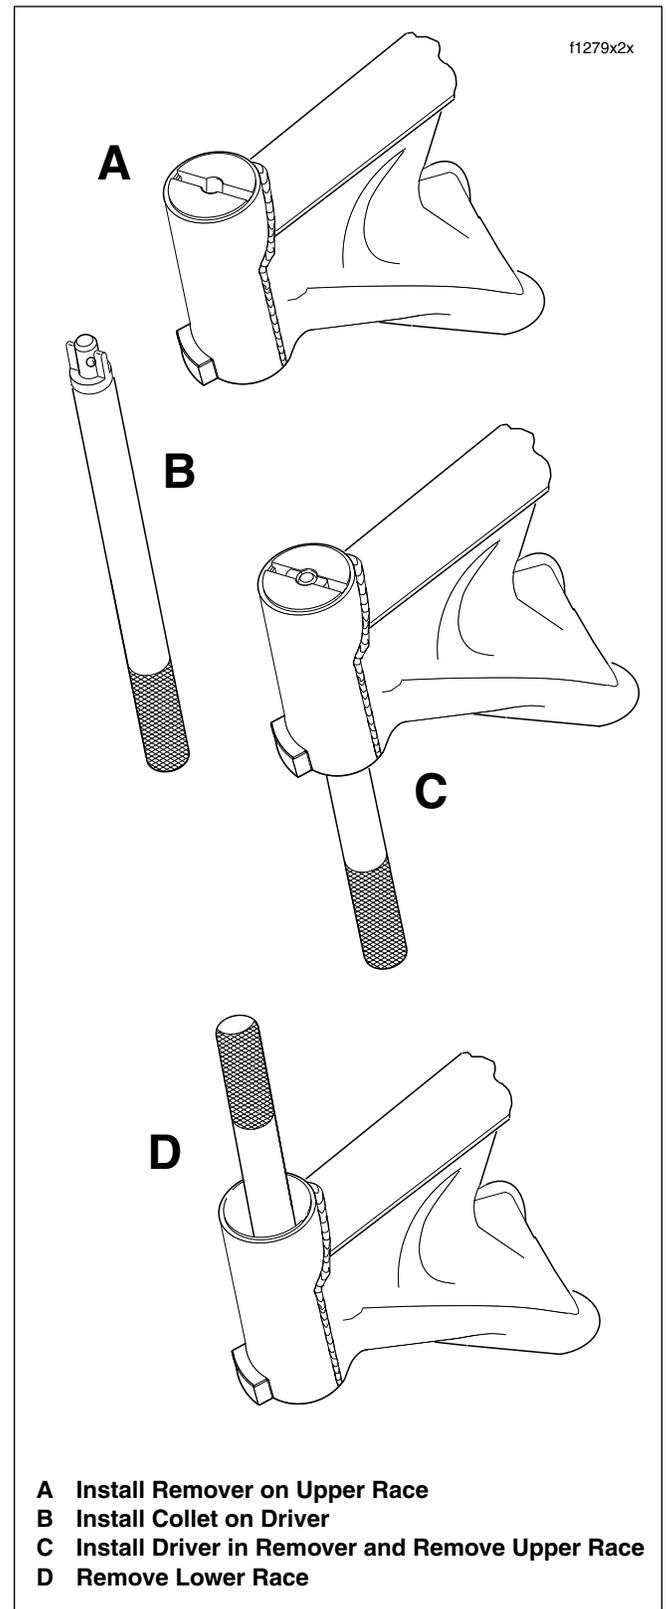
Remove Upper and Lower Steering Head Bearing Races
